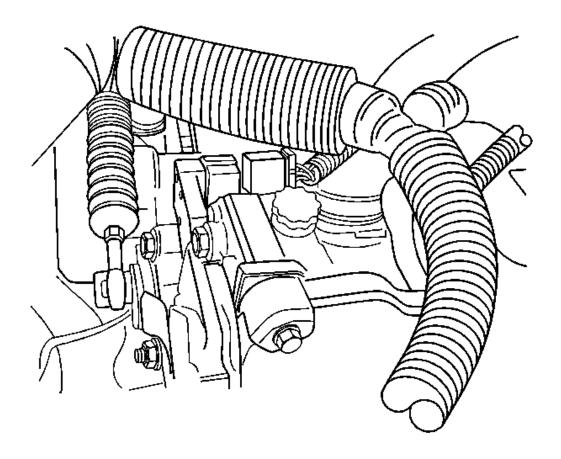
View Of Transmission Heat Shield & Bolts Courtesy of GENERAL MOTORS CORP.
